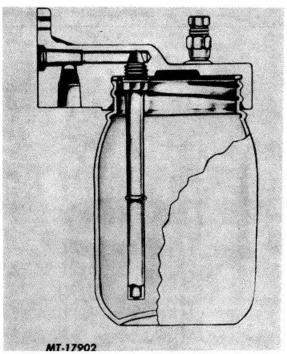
Cutaway View of AE-1 Alcohol Evaporator CONSUMPTION OF ALCOHOL
